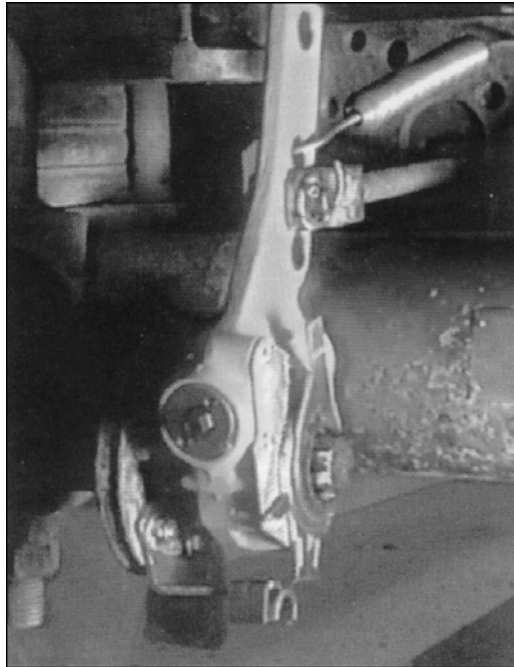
Control Arm Fixed by Groove-shaped Tail Fin
